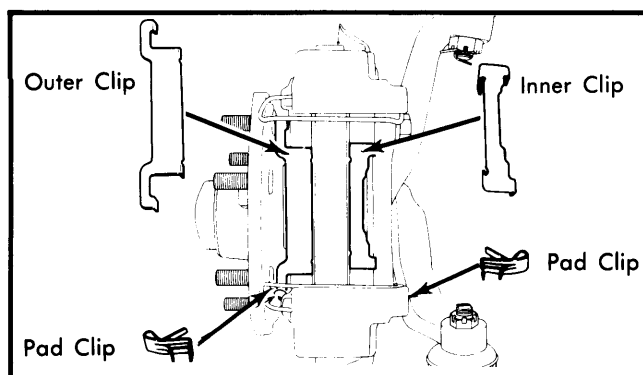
Installing Pad Retaining Clips (Challenger, Sapporo & Pickups)
